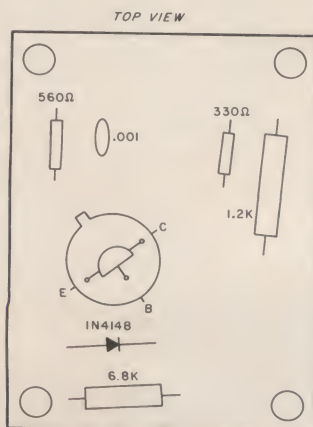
Parts layout for the TTY adapter circuit board. The flat side of the plastic 2N2222A transistor faces away from the tab printed on the board.
